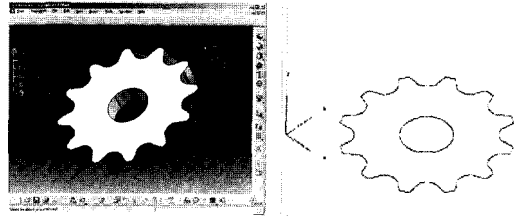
A helical gear designed(left) and a sliced profile of the gear by Quickslice(right).
